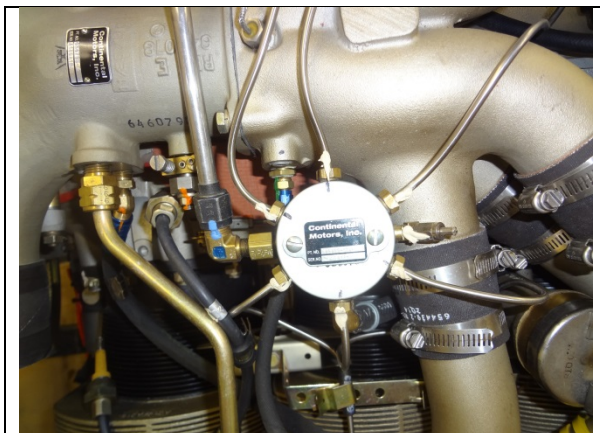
Fuel Manifold as Viewed Mounted on Top of Engine
